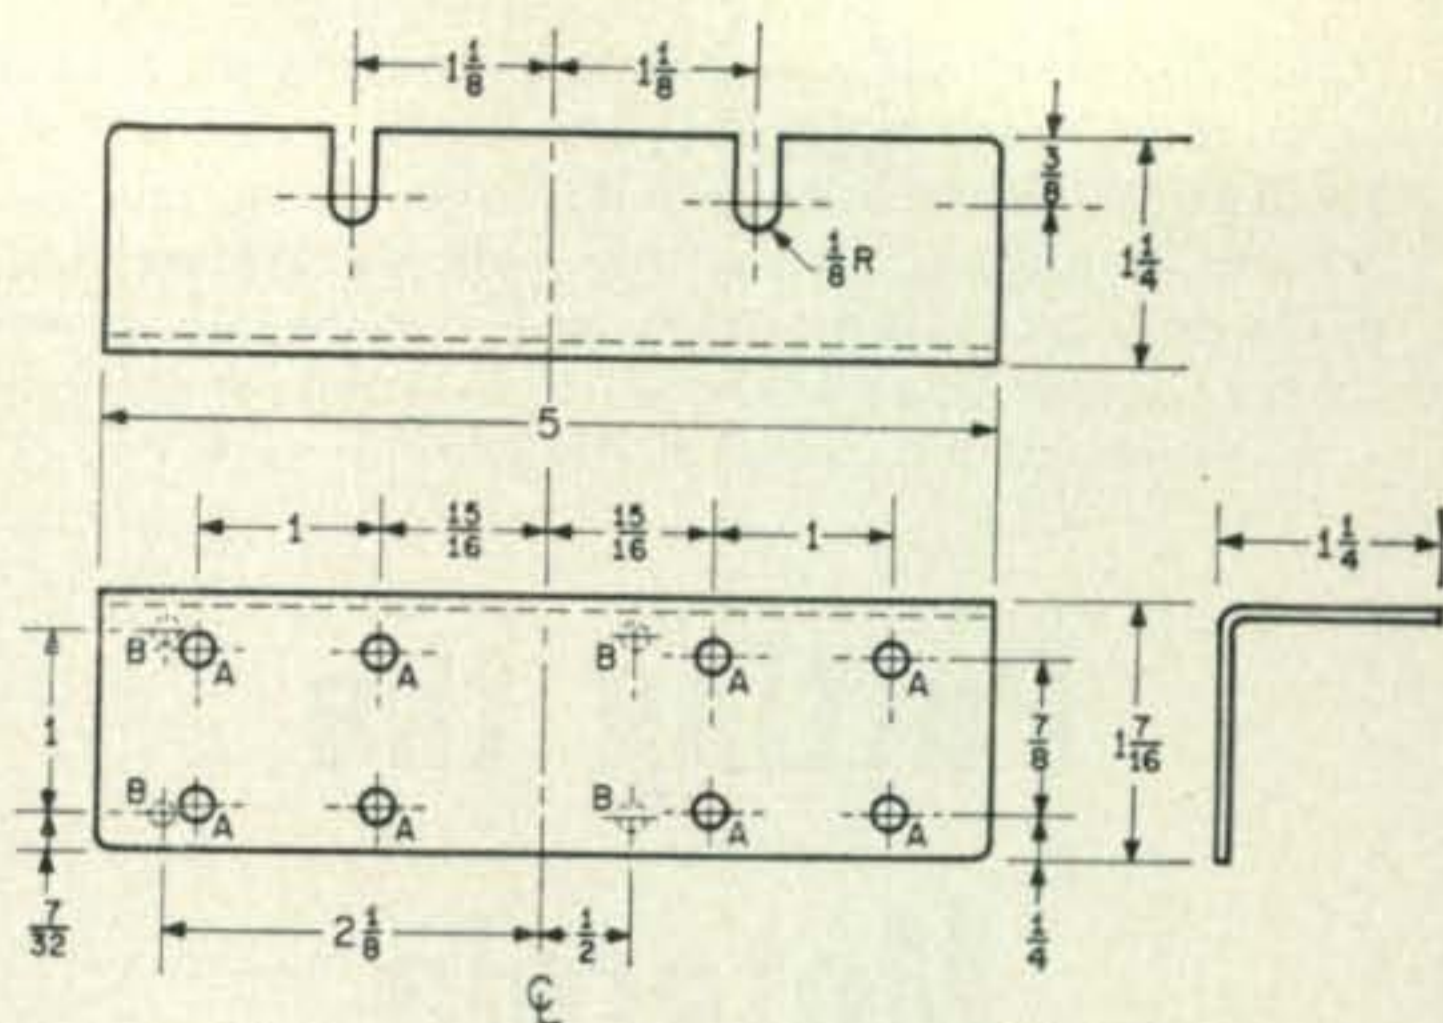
End bracket mechanical details for mounting the Motorola FMTRU-80D chassis. Holes marked A are 11/64". These are basic holes for the sensicon chassis. Those marked B are additional 5/32" holes for the unichannel chassis. Brackets should be fabricated from #16 gauge steel or 1/16" aluminum.
